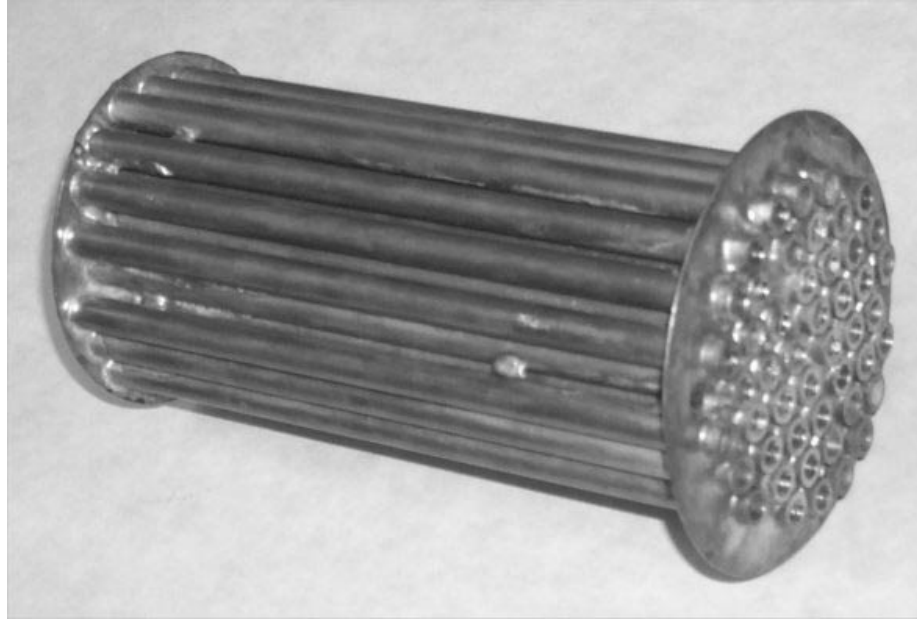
Tube bundle assembly for the shell-and-tube heat exchanger
